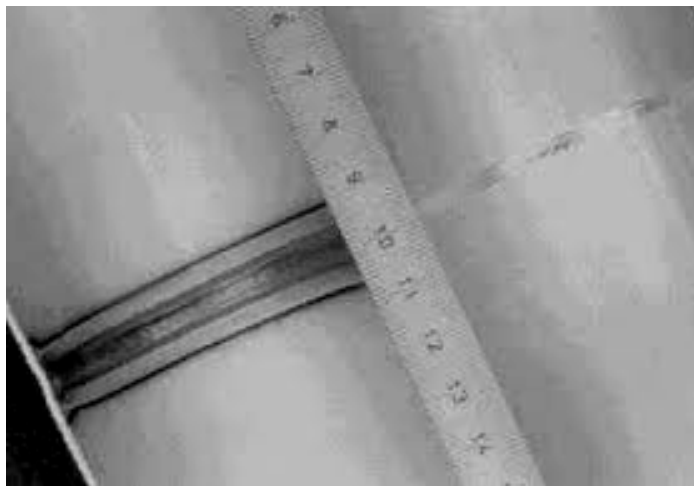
Welded joint with heat tint and after removing heat tint.
